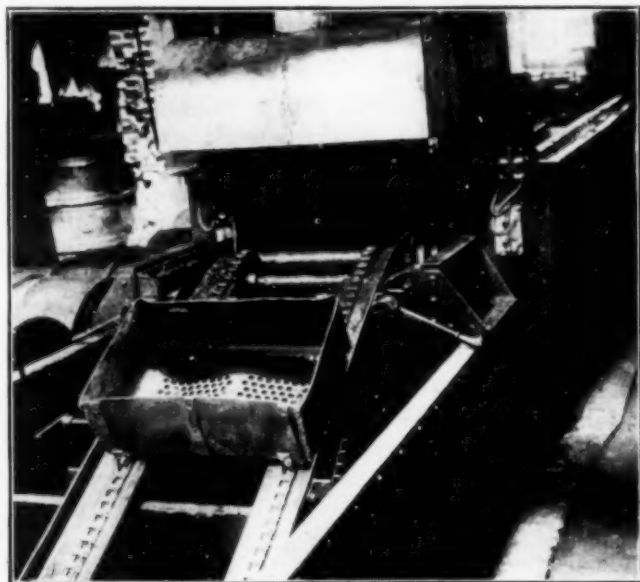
CONVEYOR LIFTING CONTAINER FOR QUENCHING BATH PREPARATORY TO SLIDING INTO DRAWING TANK
